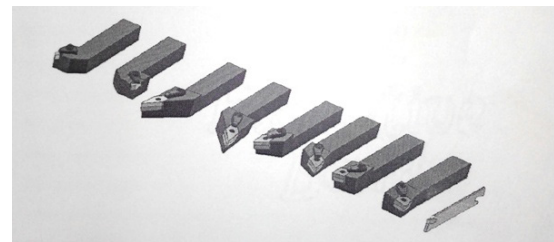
Typical Turning, Thread Cutting and Parting Tools used in CNC Lathe.
